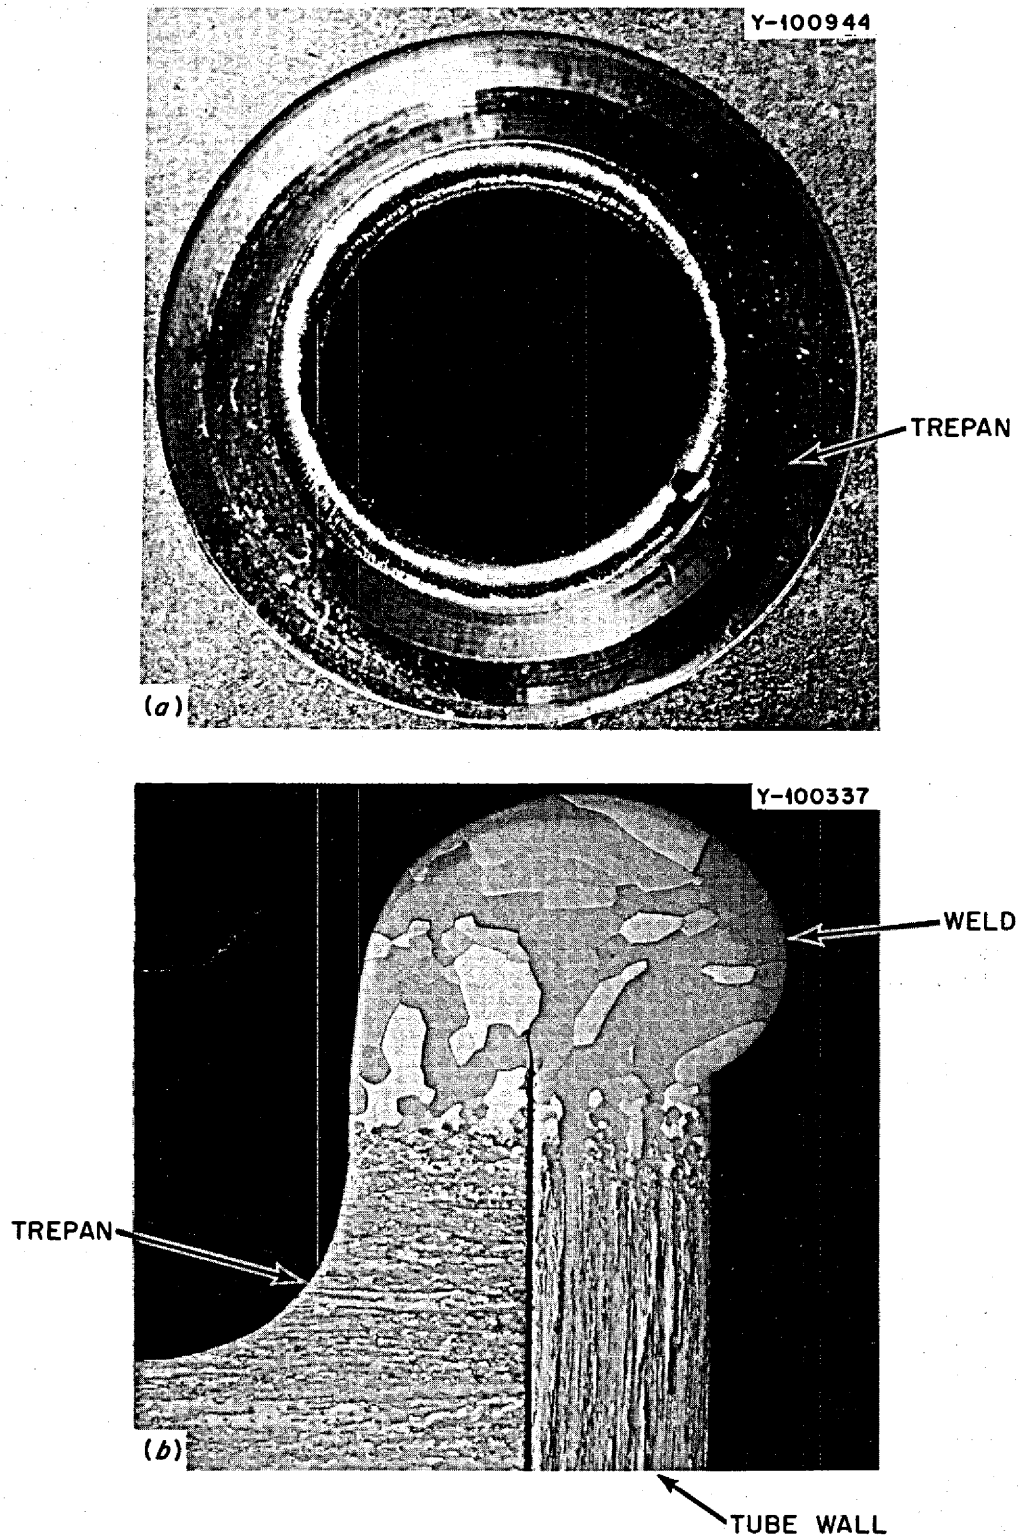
Electron-Beam-Welded Molybdenum Tube-to-Header Joints. (a) $\frac{3}{8}$ -in.-OD tube. (b) $\frac{1}{4}$ -in.-OD \times 0.040-in.-wall tube; etchant - 50% NH_4OH , 50% H_2O_2 .
